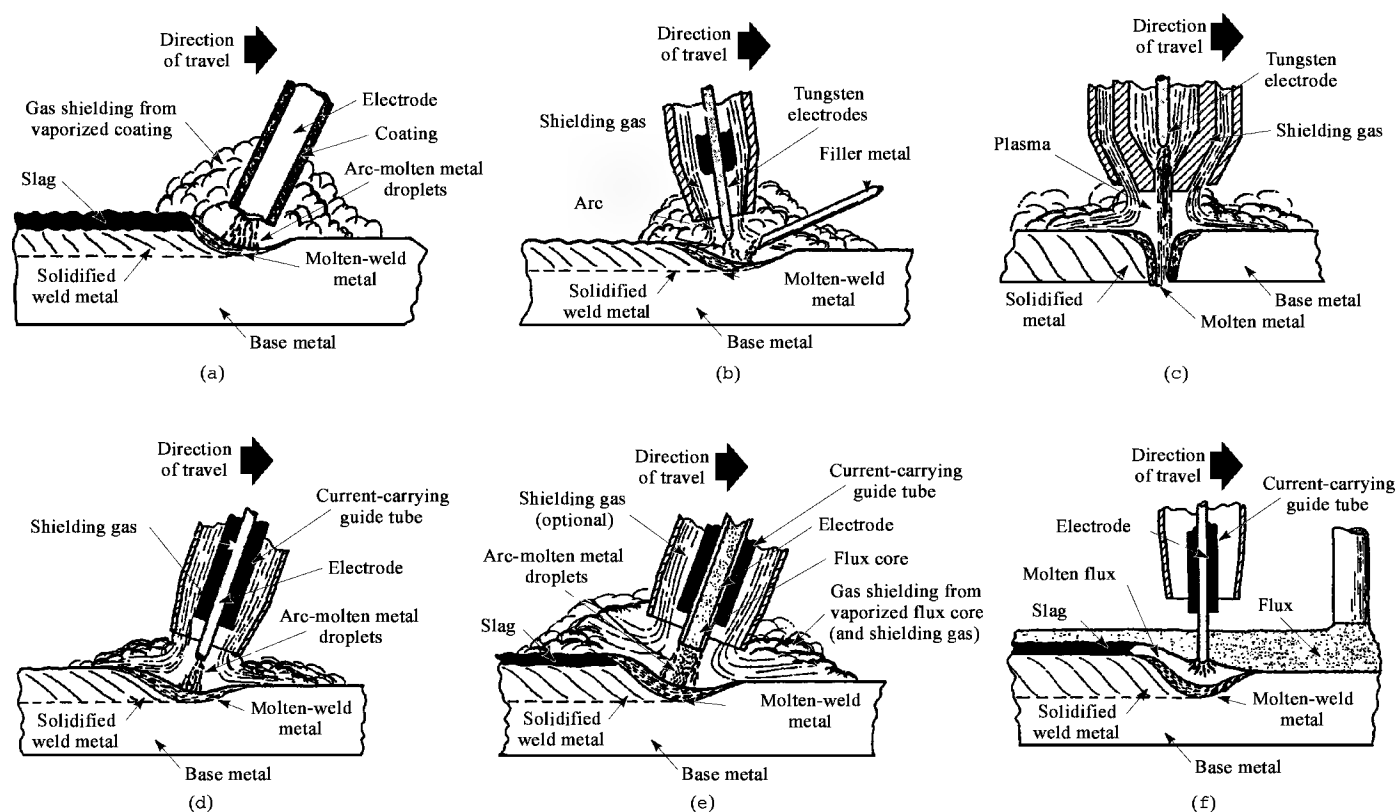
(a) The shielded-metal arc-welding (SMAW) process. (b) The gas-tungsten arc-welding (GTAW) process. (c) The plasma arc-welding (PAW) process. (d) The gas-metal arc-welding (GMAW) process. (e) The flux-cored arc-welding (FCAW) process. (f) The submerged arc-welding (SAW) process.
